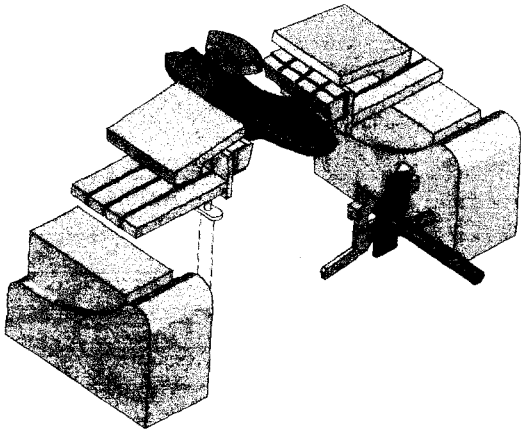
Initial position of the parts and the last of the heel/side lasting machine.
